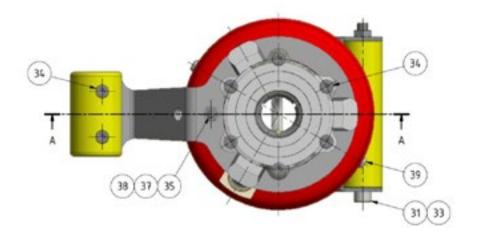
Tensioner (Components, Fittings, Couplings and Hoses)
